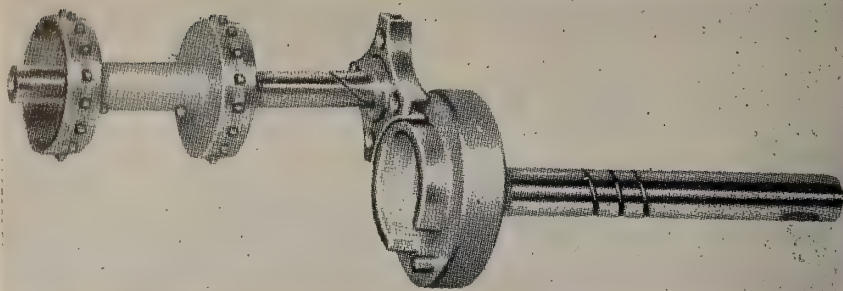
Basic parts of a geneva intermittent movement—all makes. The sprocket is attached to the starwheel shaft, and the flywheel (not shown) is attached to the cam shaft either directly (Brenkert, Motiograph, Simplex X-L) or through 1-to-1 pinion gears (Simplex Regular, Super, and E-7).
